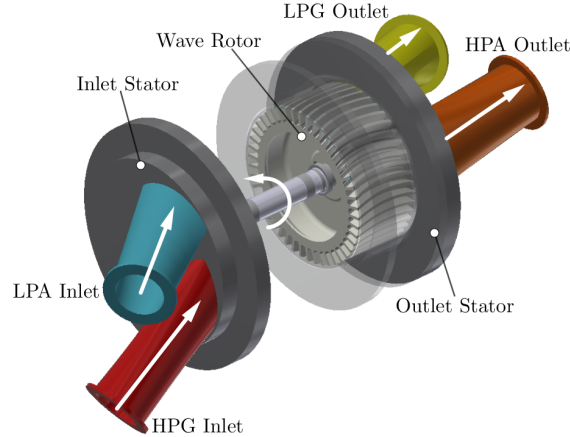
Principal wave rotor components of a four-port device consisting of wave rotor with arranged circumstantially and flanked to each side by in- and outlet stator endplates.
